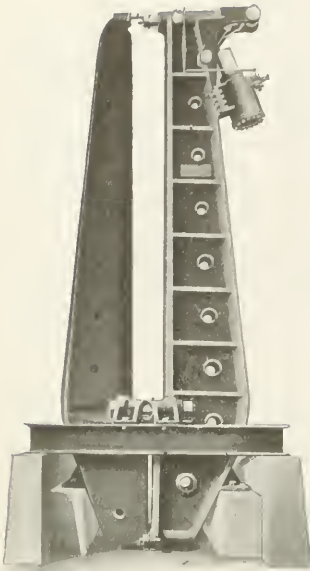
Left-hand Side of Machine showing Single Pulley Drive
